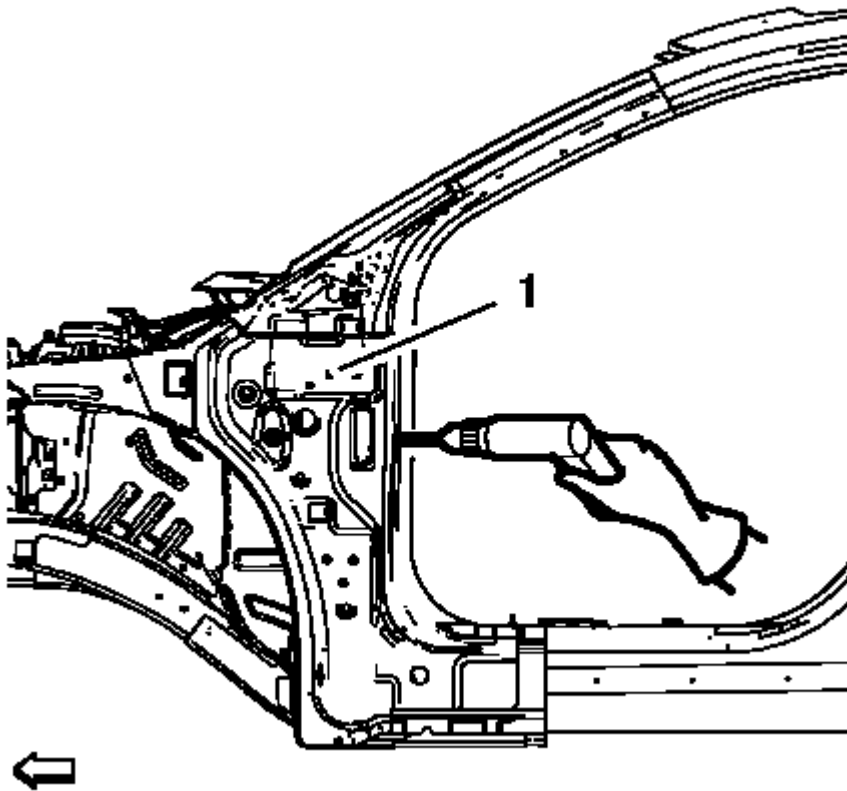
Drilling Factory Welds Of Body Hinge Pillar Lower Reinforcement
